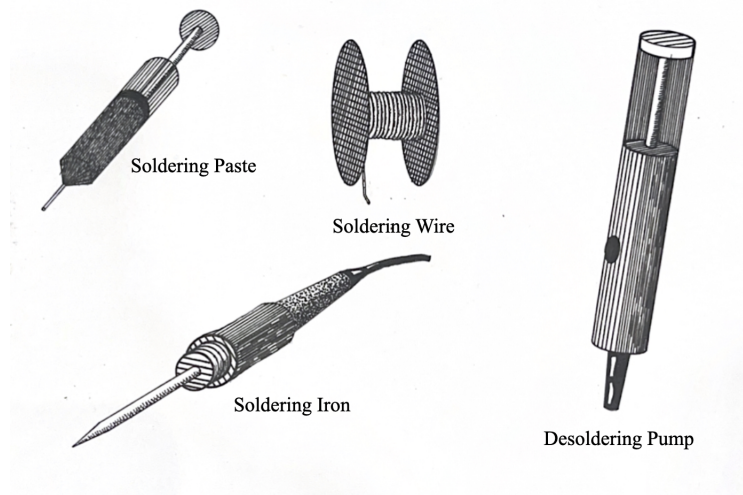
Sketches of Soldering Paste, Soldering Wire, Soldering Iron, and Desoldering Pump are layed out.
